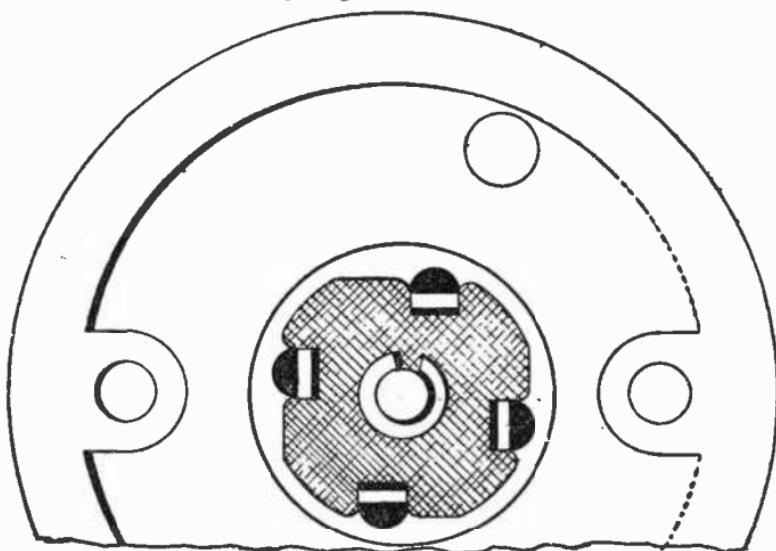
,059.—H & H snap switch method of attaching mechanism to base. In construction, metal plates on top and bottom of the porcelain base, riveted together, form the supports for the spindle and act as bearings for it. No matter how the spindle is yanked or wrenches in service these plates hold the spindle and mechanism in alignment.
